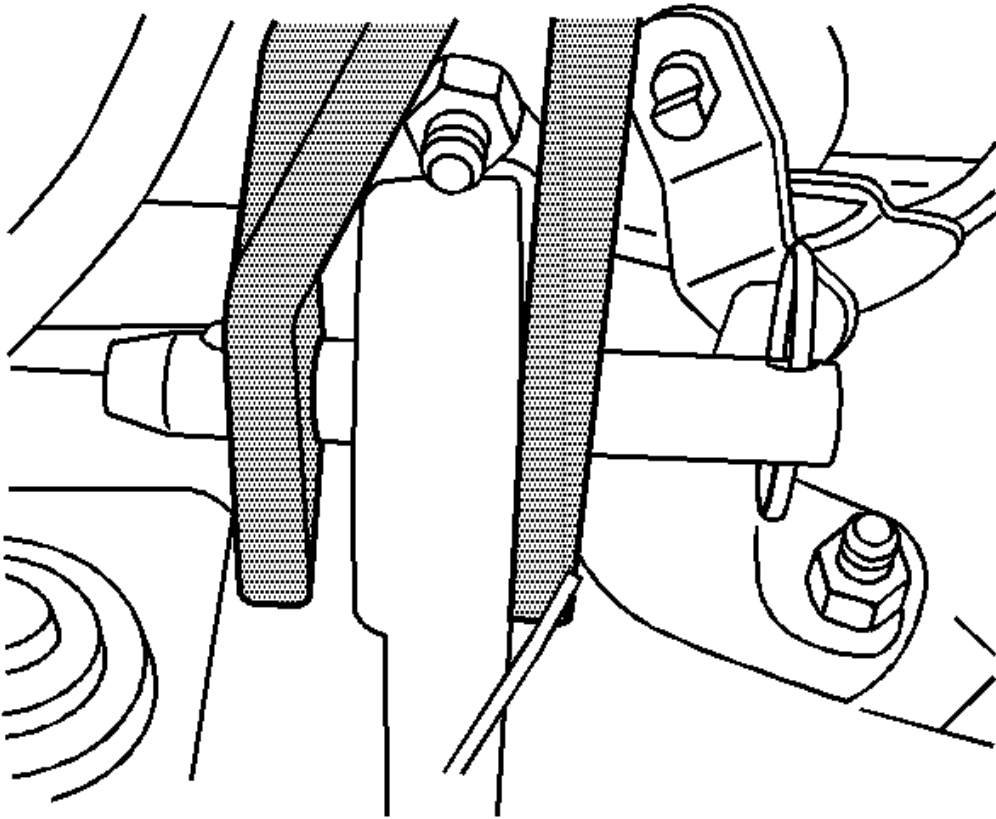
Installing J 45057 To Left Side Engine Lift Bracket
